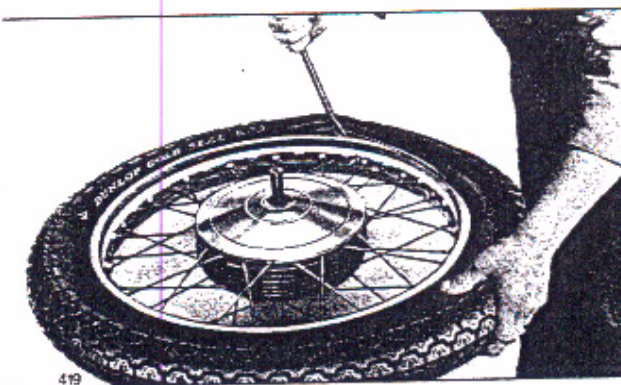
Refitting the second bead over the wheel rim. Care must be taken not to trap inner tube
